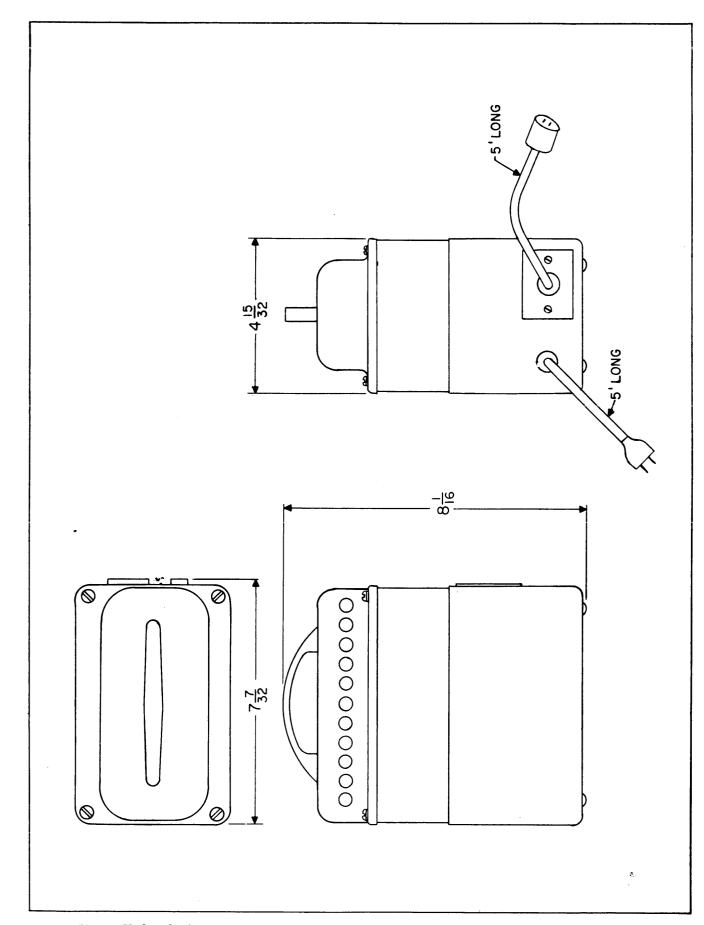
Outline Dimensional Drawing, Constant-Voltage Transformer, T-3003A-1.
